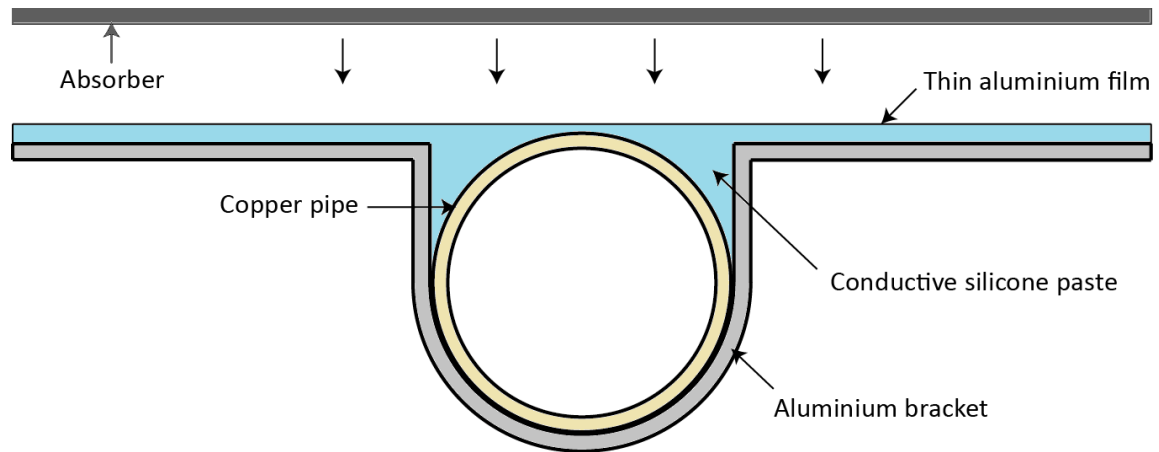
Cross sectional view of the contact mechanism using aluminium brackets
